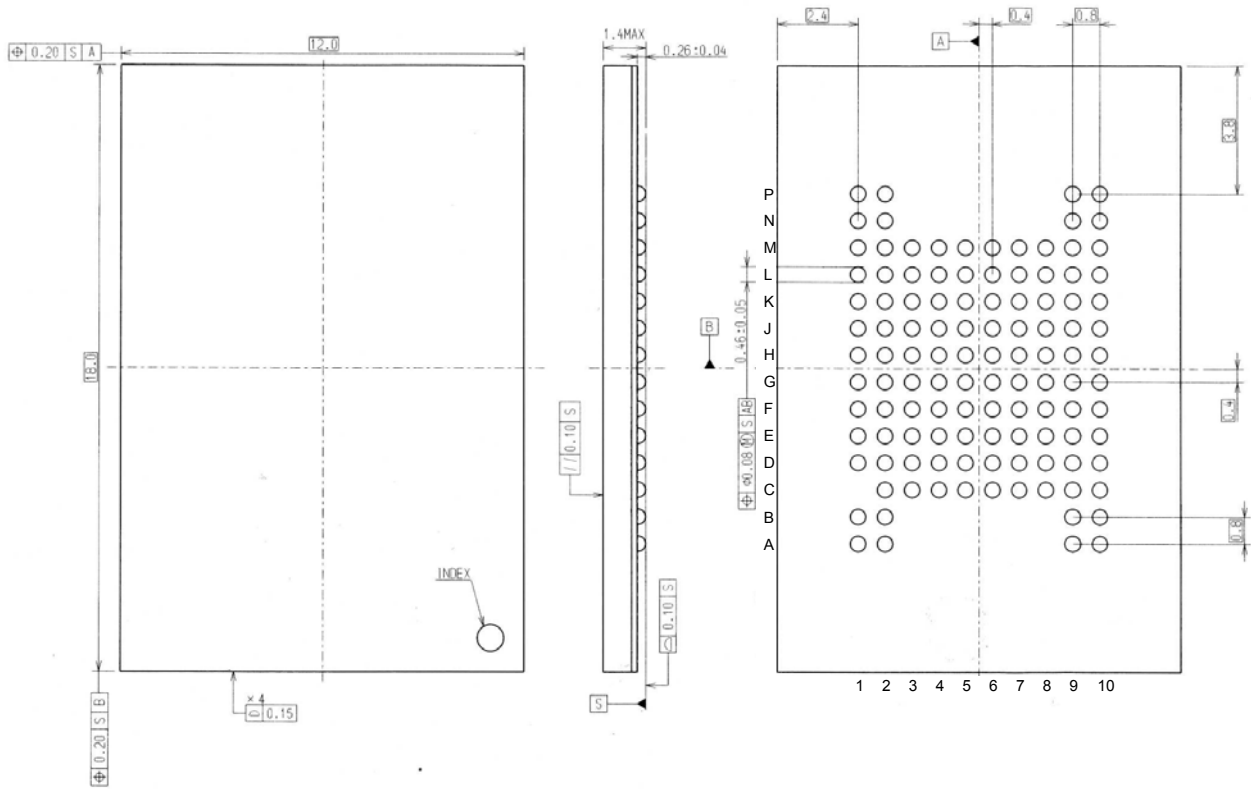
Mechanical Dimensions 12x18 FBGA Package (Bottom View)
